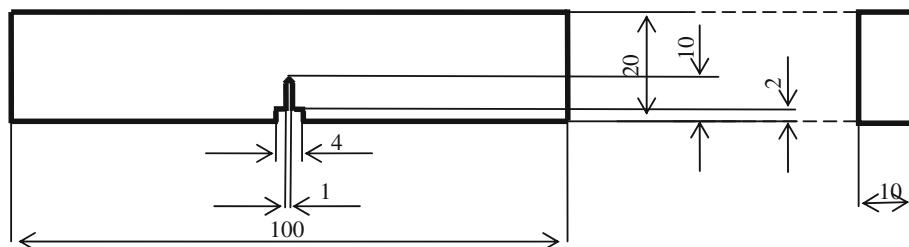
Dimension of fracture toughness test's specimen (mm)
